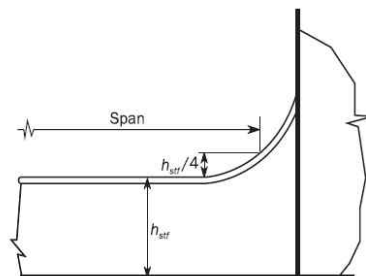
Effective bending span for local support members with continuous face plate along bracket edge
